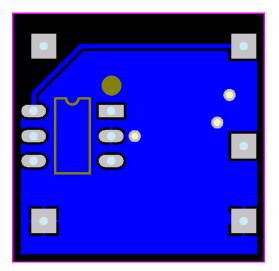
Bottom, TDFN4 1.2 mm x 1.6 mm PCB Layout
